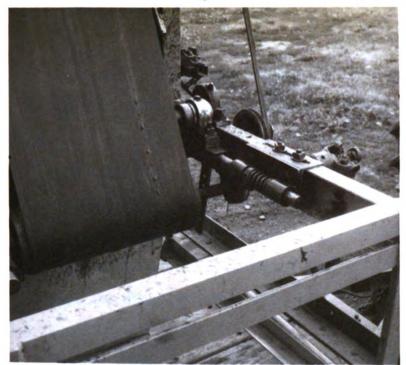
The spring loaded mounting bracket for the spring loaded roller.
